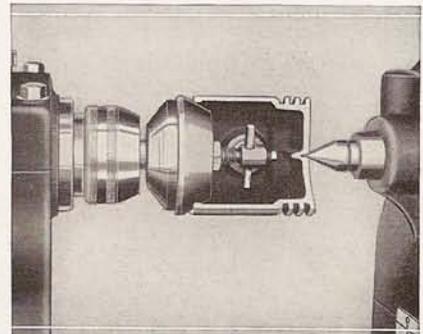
Cross Section View of a Piston Mounted in Lathe Showing Application of the Piston Adapter.
